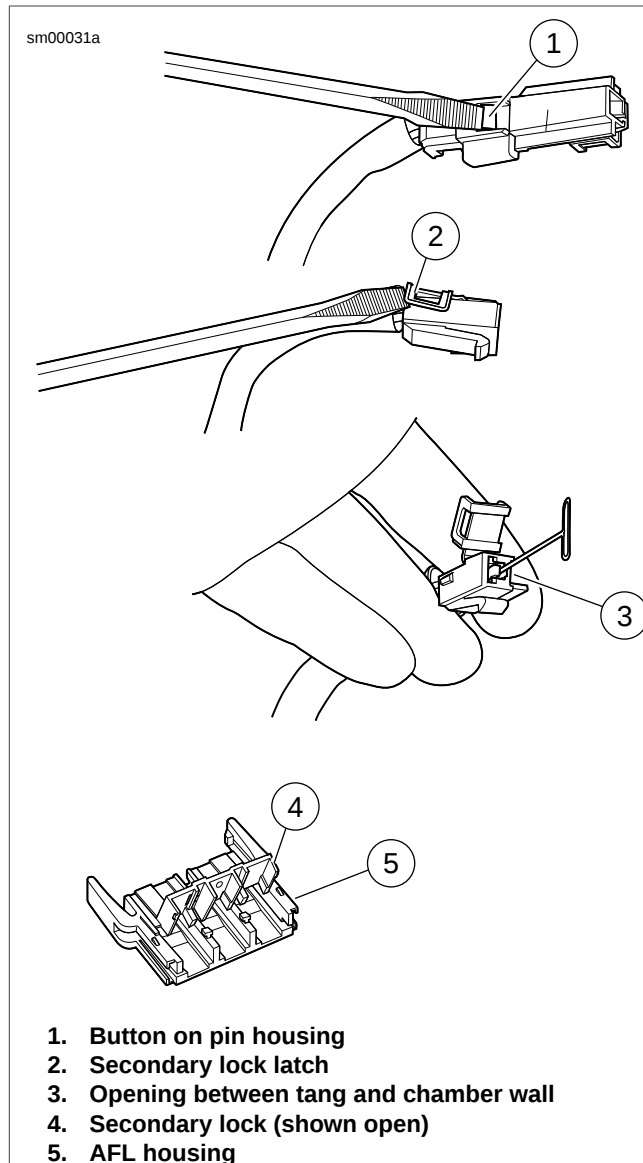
Delphi 480 Metri-Pack Unsealed Connector: Remove Socket Terminal
